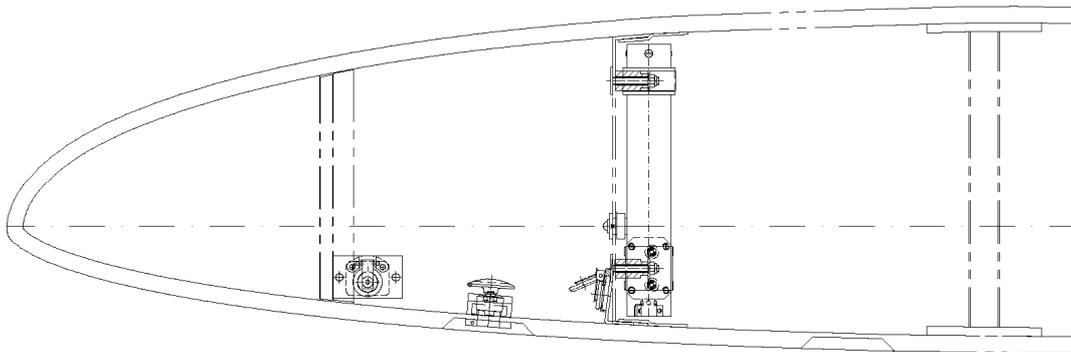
Position of Sensors in Aircraft wing (wing section)
